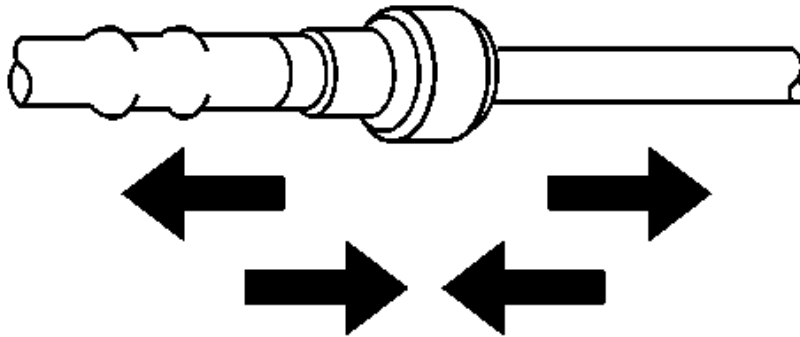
Ensuring Connection (Metal Collar) Is Secure
